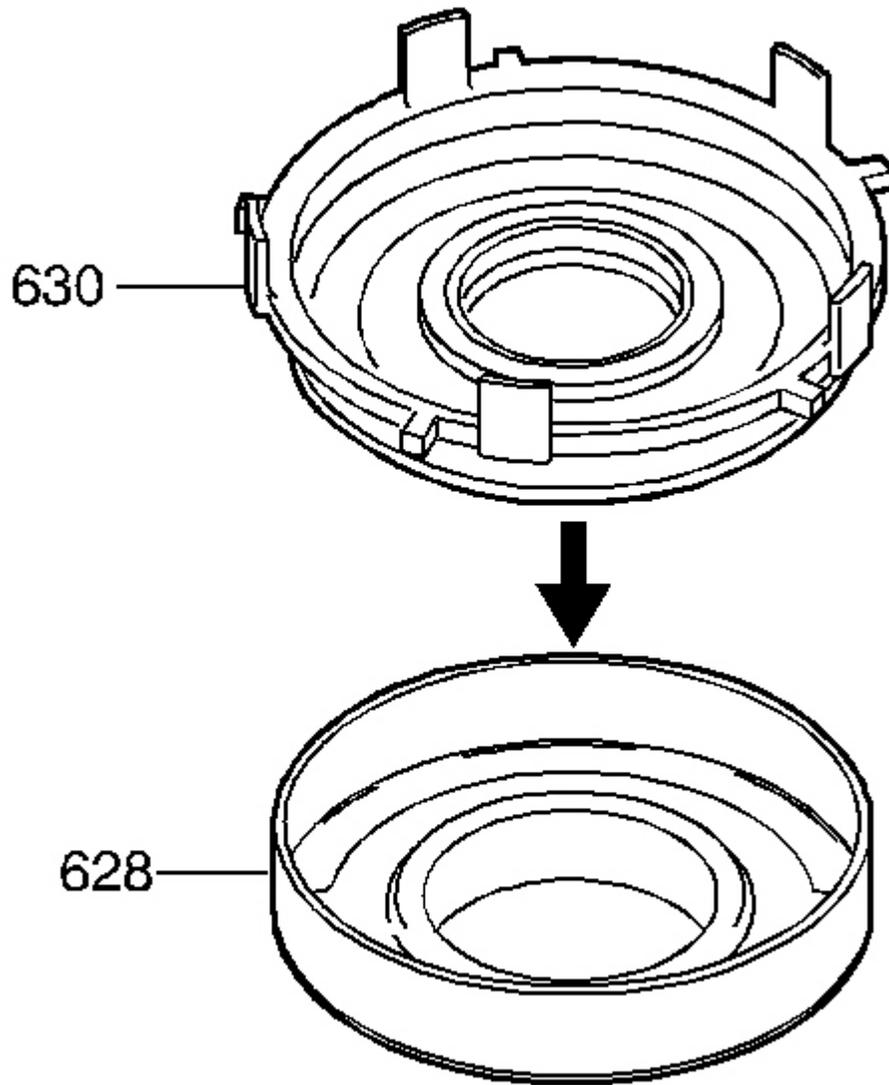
Forward Clutch Piston & Forward Clutch Housing
